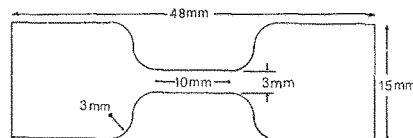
Plan of the test piece, (depth 3 mm at all points); all radii are 3 mm.
